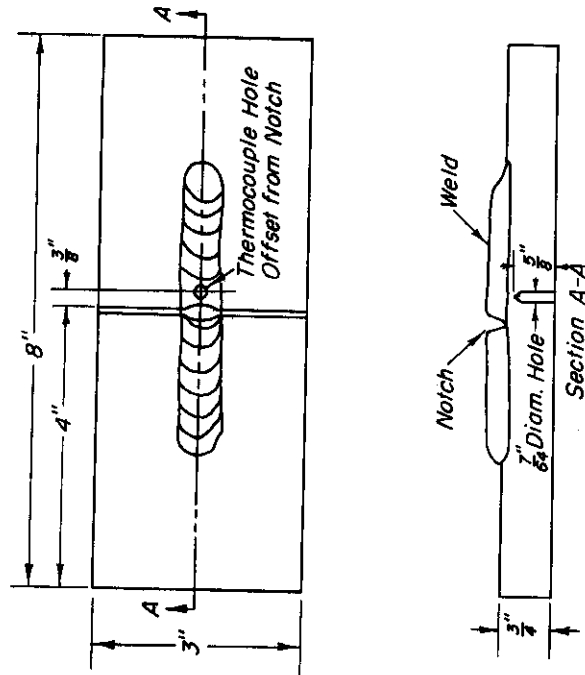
SKETCH SHOWING ARRANGEMENT OF THERMOCOUPLE HOLE TO RECORD COOLING RATES ON KINZEL-TYPE SPECIMEN
